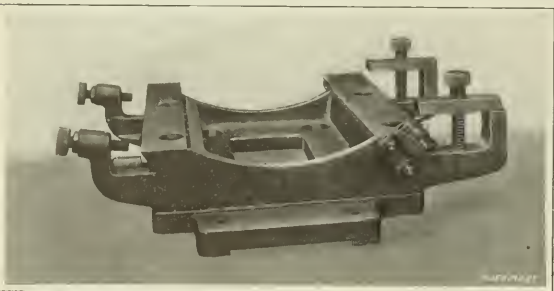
Fixture used on Heald Planetary Grinder for grinding Cylinder Bearing in Carriage
